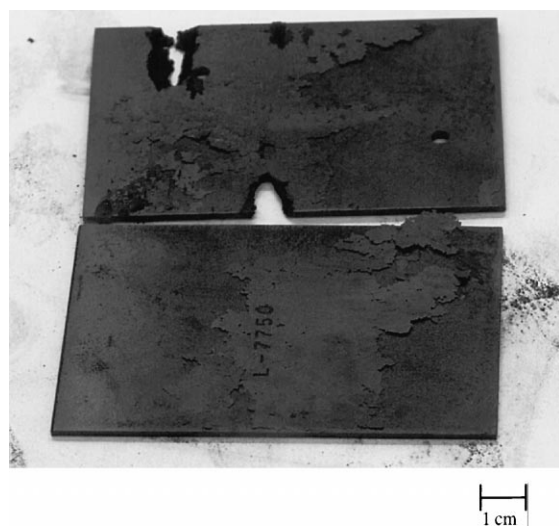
Coupons from plate in Fig. 2 showing severe local and general corrosion.
